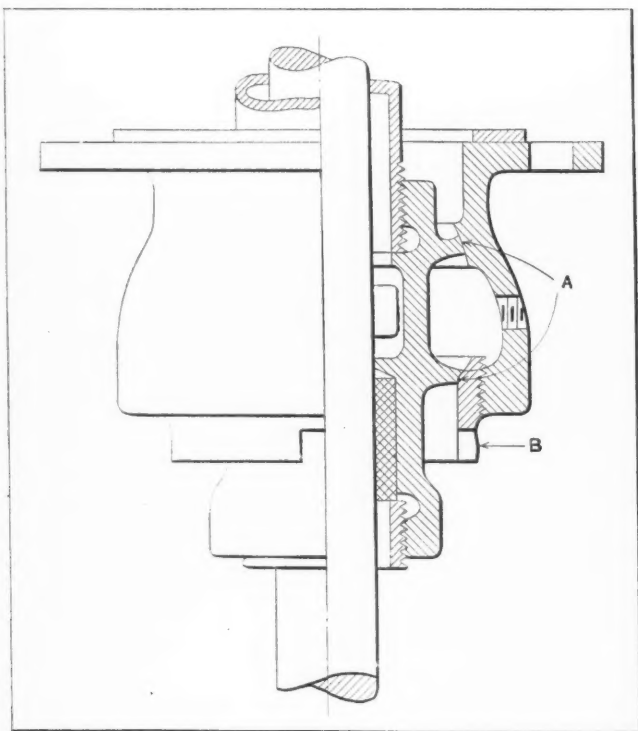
Adjustable Lower Bearing for Scraper Push-rod
